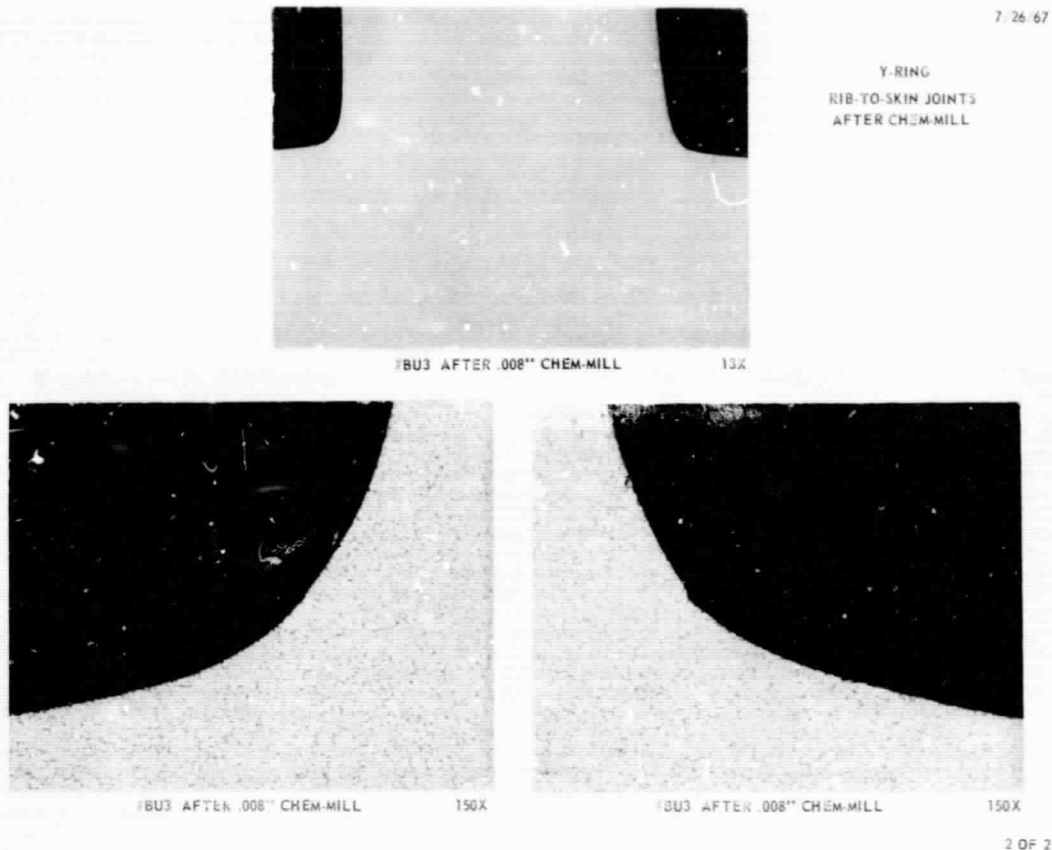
Y-RING RIB-TO-SKIN ROLL DIFFUSION JOINTS AFTER CHEM-MILLING
